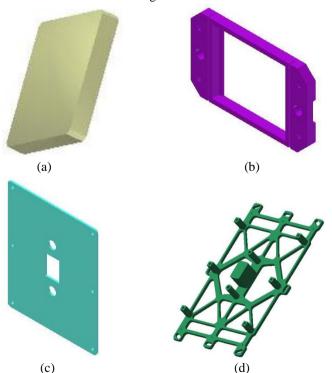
(a) Detector (b) Detector Mount (c) PCB (d) DHA Frame
